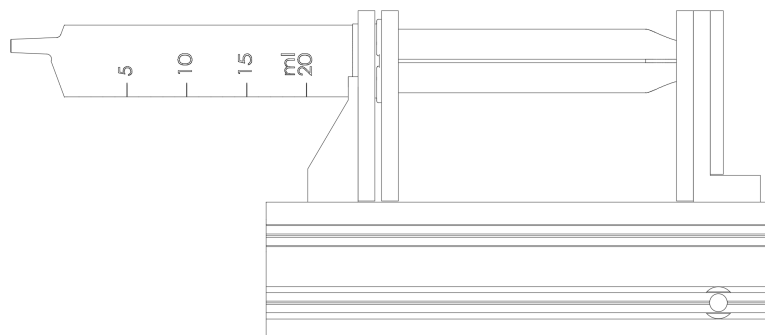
3D Printed Mount for Toothpaste Tank Syringe: Lead Screw with Maxon DC Motor and Gearbox for Mechanism Drive, Aluminum Profiles for Linear Guidance of Syringe Sliding Pusher
